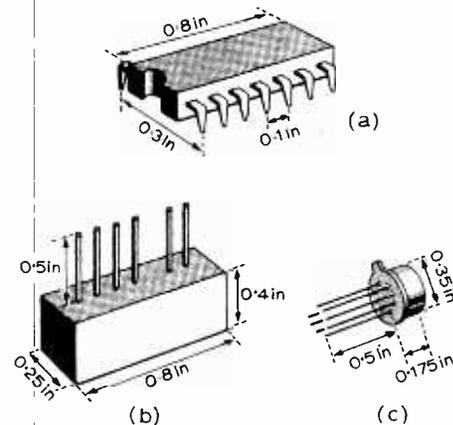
Typical common low-power linear microcircuit packages for attachment to non-copperside of printed circuit board: (a) Dual-in-line; (b) single-in-line; (c) multilead TO-5.
